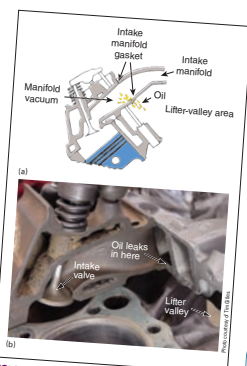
Oil can be drawn into the intake manifold past a faulty manifold gasket.
